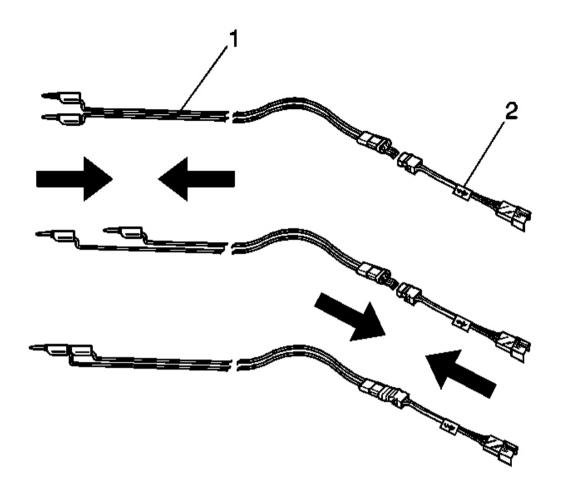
SIR Deployment Harness & Adapter Courtesy of GENERAL MOTORS CORP.
